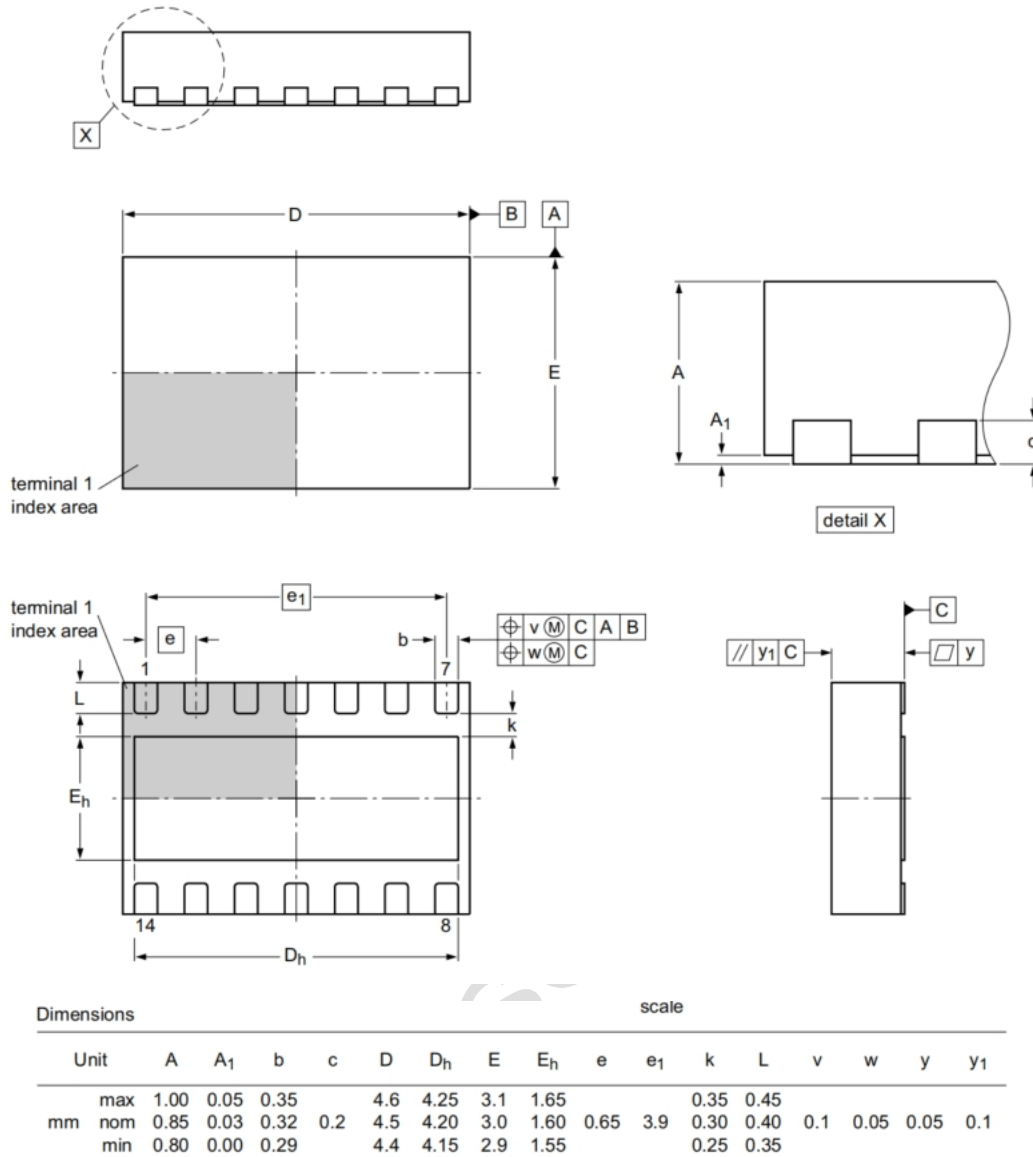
DFN14 Package Shape and Dimension in millimeters and (inches)
